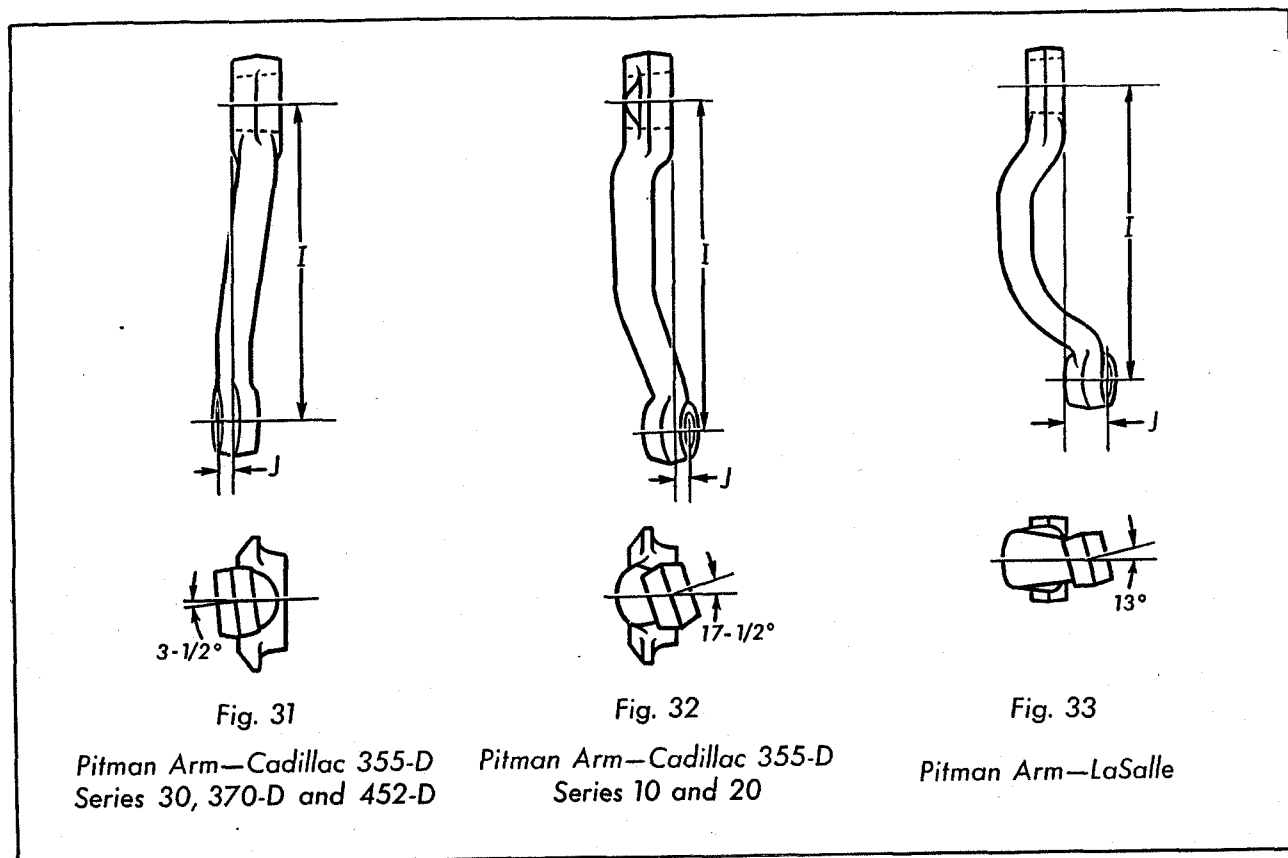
Alignment of Front Wheel Suspension and Steering System Parts
